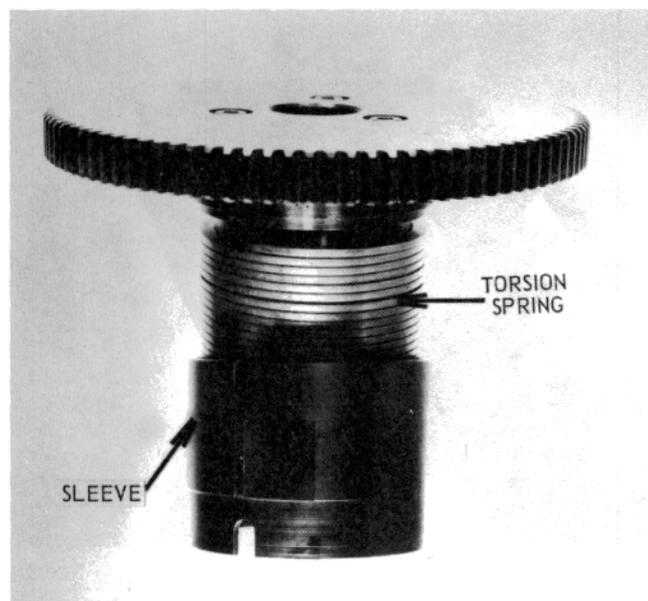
Cocking Clutch Gear, Sleeve, and Torsion Spring
